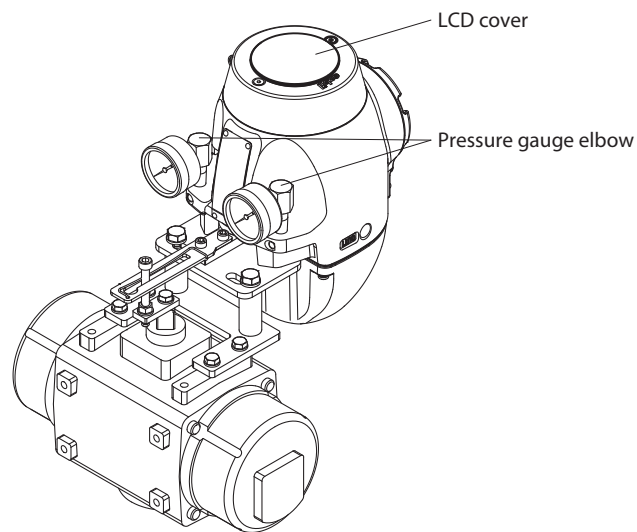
Example of LCD cover and pressure gauge elbow mounting
